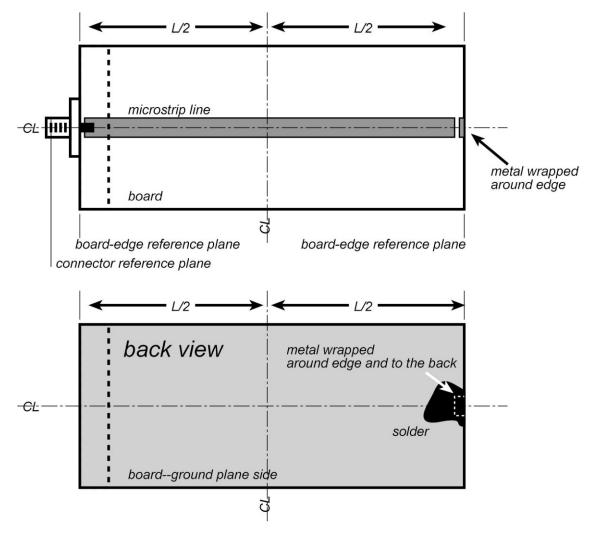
Passive component test structure part 2, cut to mount passive component. .
